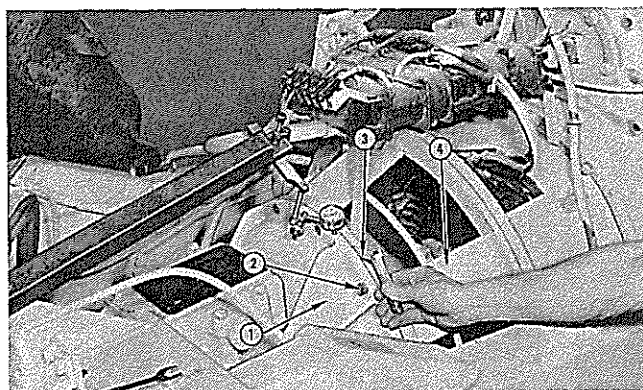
CHECKING SPACE BETWEEN END BELL AND BELL HOUSING
